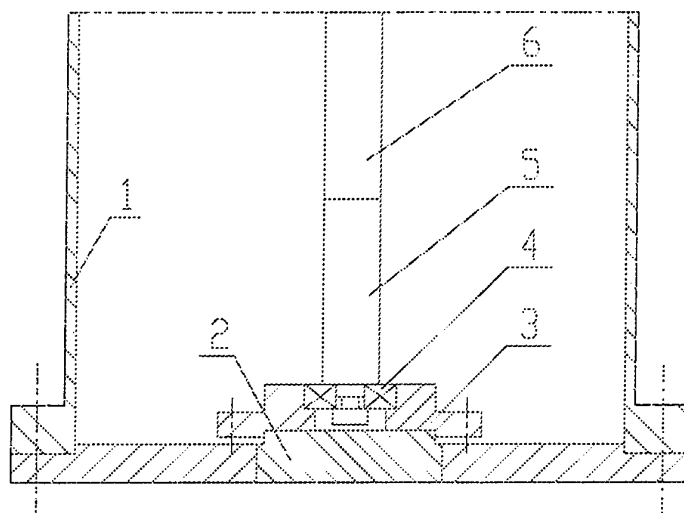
Arrangement of the ball bearing sample: 1-vacuum chamber; 2-thermal link (copper); 3-bearing holder (copper); 4-ball bearing sample; 5-copper rod; 6-actuating tube.
